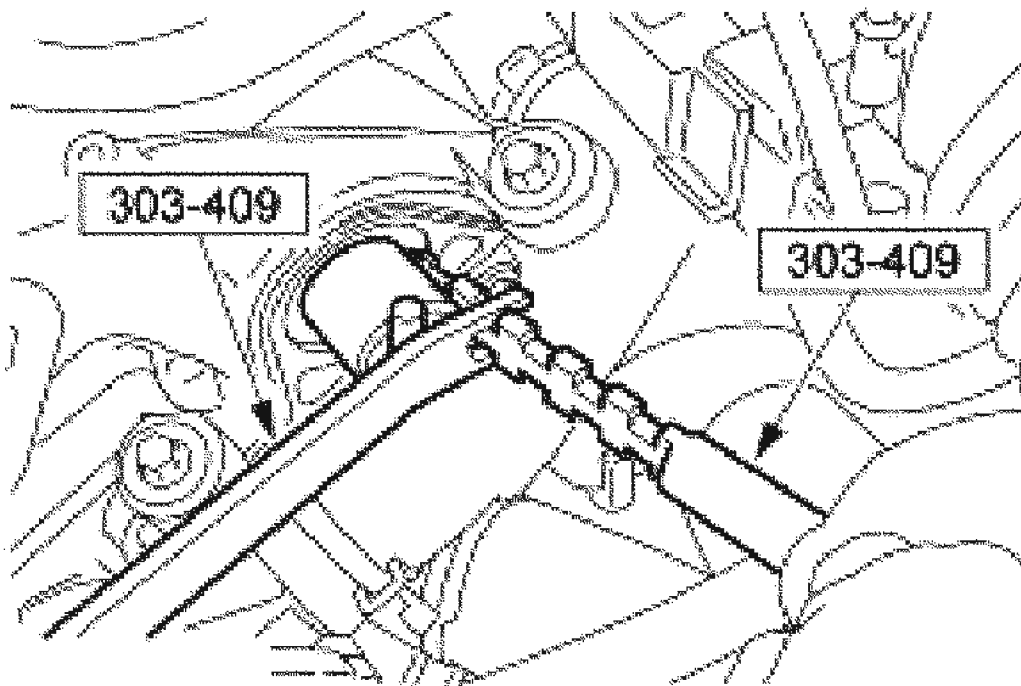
Removing Water Pump Drive Pulley Using Special Tool
